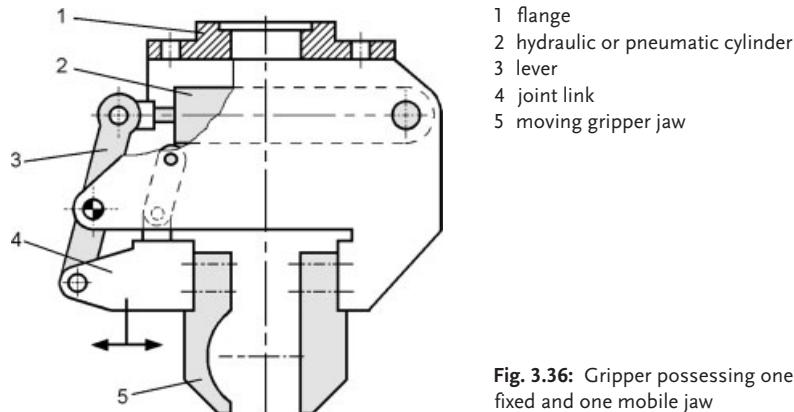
Gripper possessing one fixed and one mobile jaw
